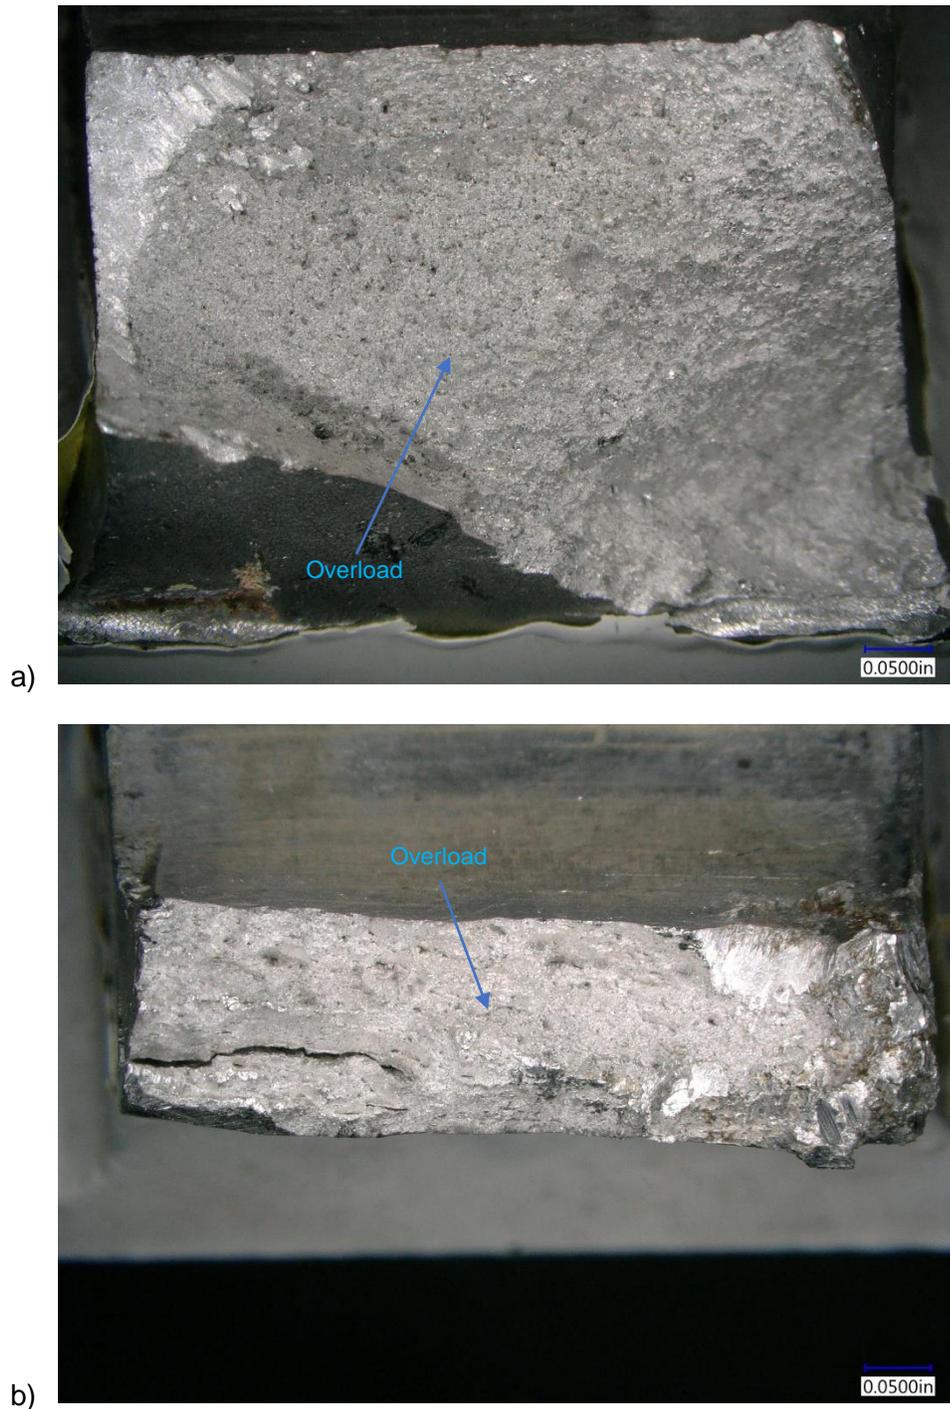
Fracture Piece #4, connection piece between upper and lower torque knees. a) 7x magnification b) 7x magnification
